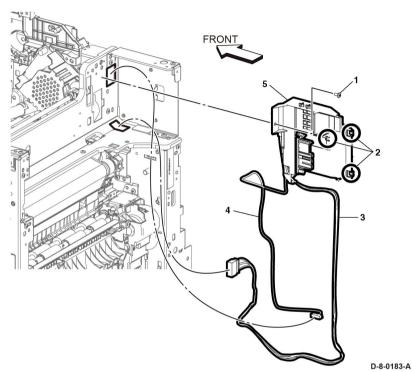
AC 100V/200V/-CF fusing harness assembly removal
